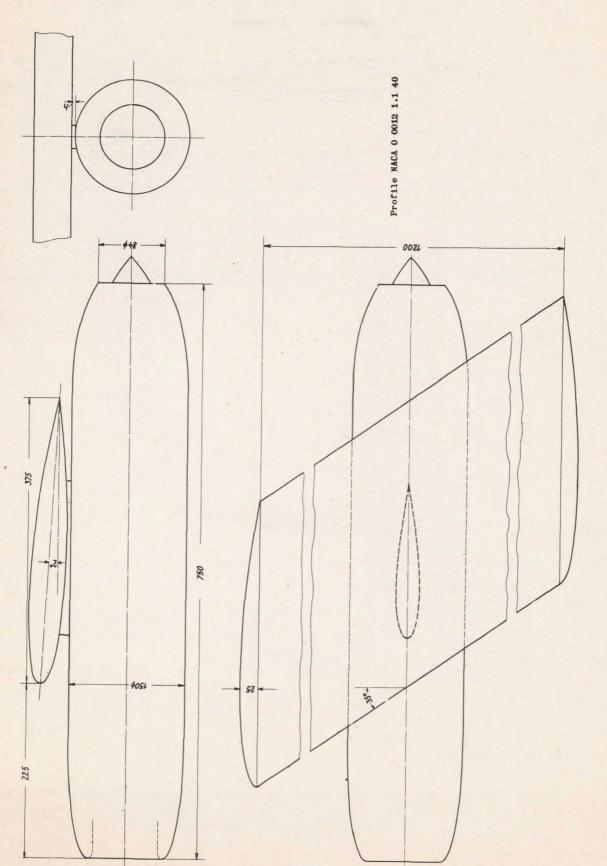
Arrangement 16, 17; over-all drawing. (h = 10 mm)
